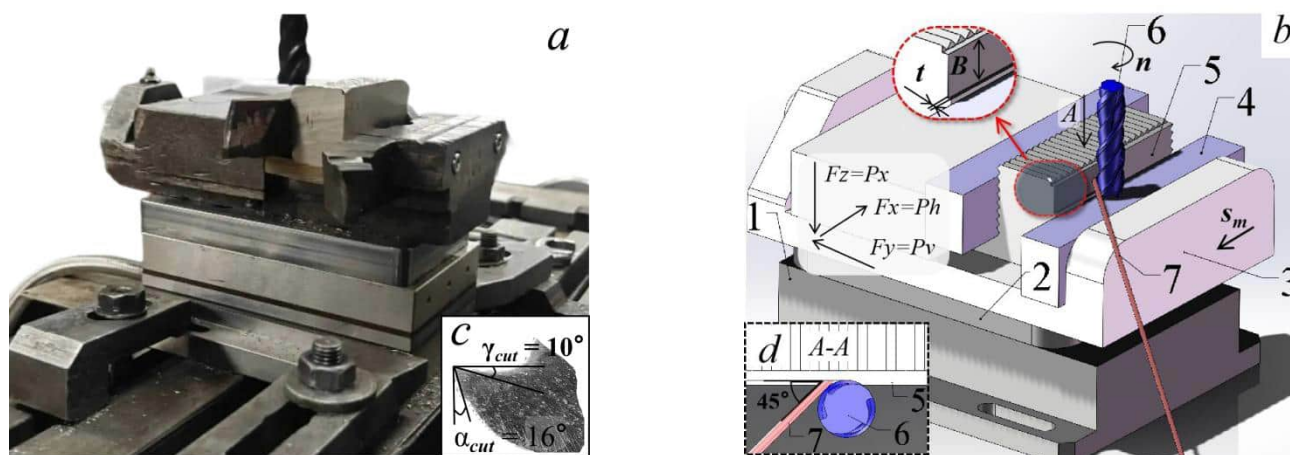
Photograph (a), three-dimensional model (b) of dynamometer, cutter, specimen, cutter tooth geometry installed in the main section plane (c), and position of the infrared thermometer beam, specimen and cutter along A arrow. B – milling width, t – milling depth, n – rotational speed of a cutter, s_m – feed per minute (d)
